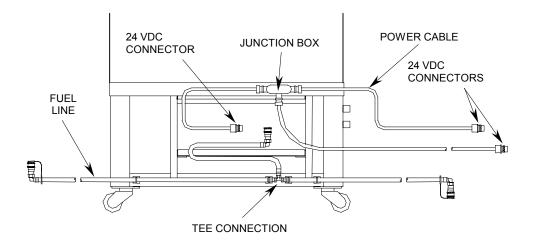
Oven Fuel Line and Power Cable Assemblies.
